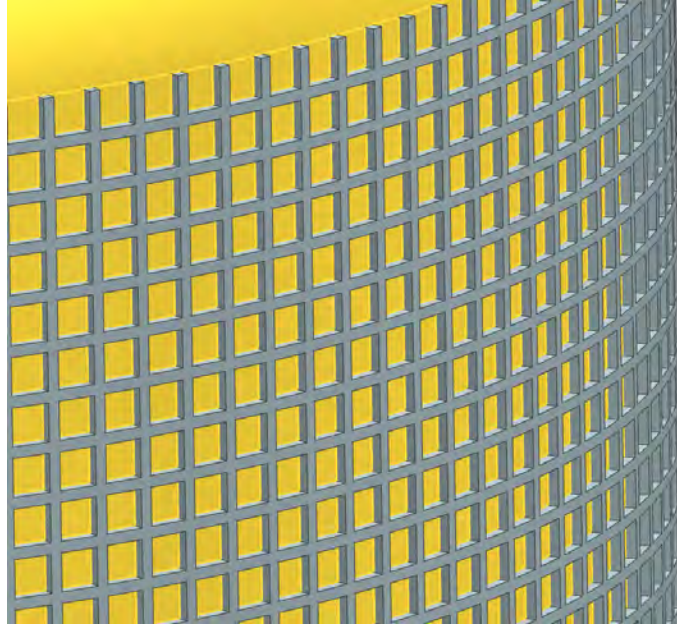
Rib And Stringer Connection to Pressure Vessel Close-Up View
